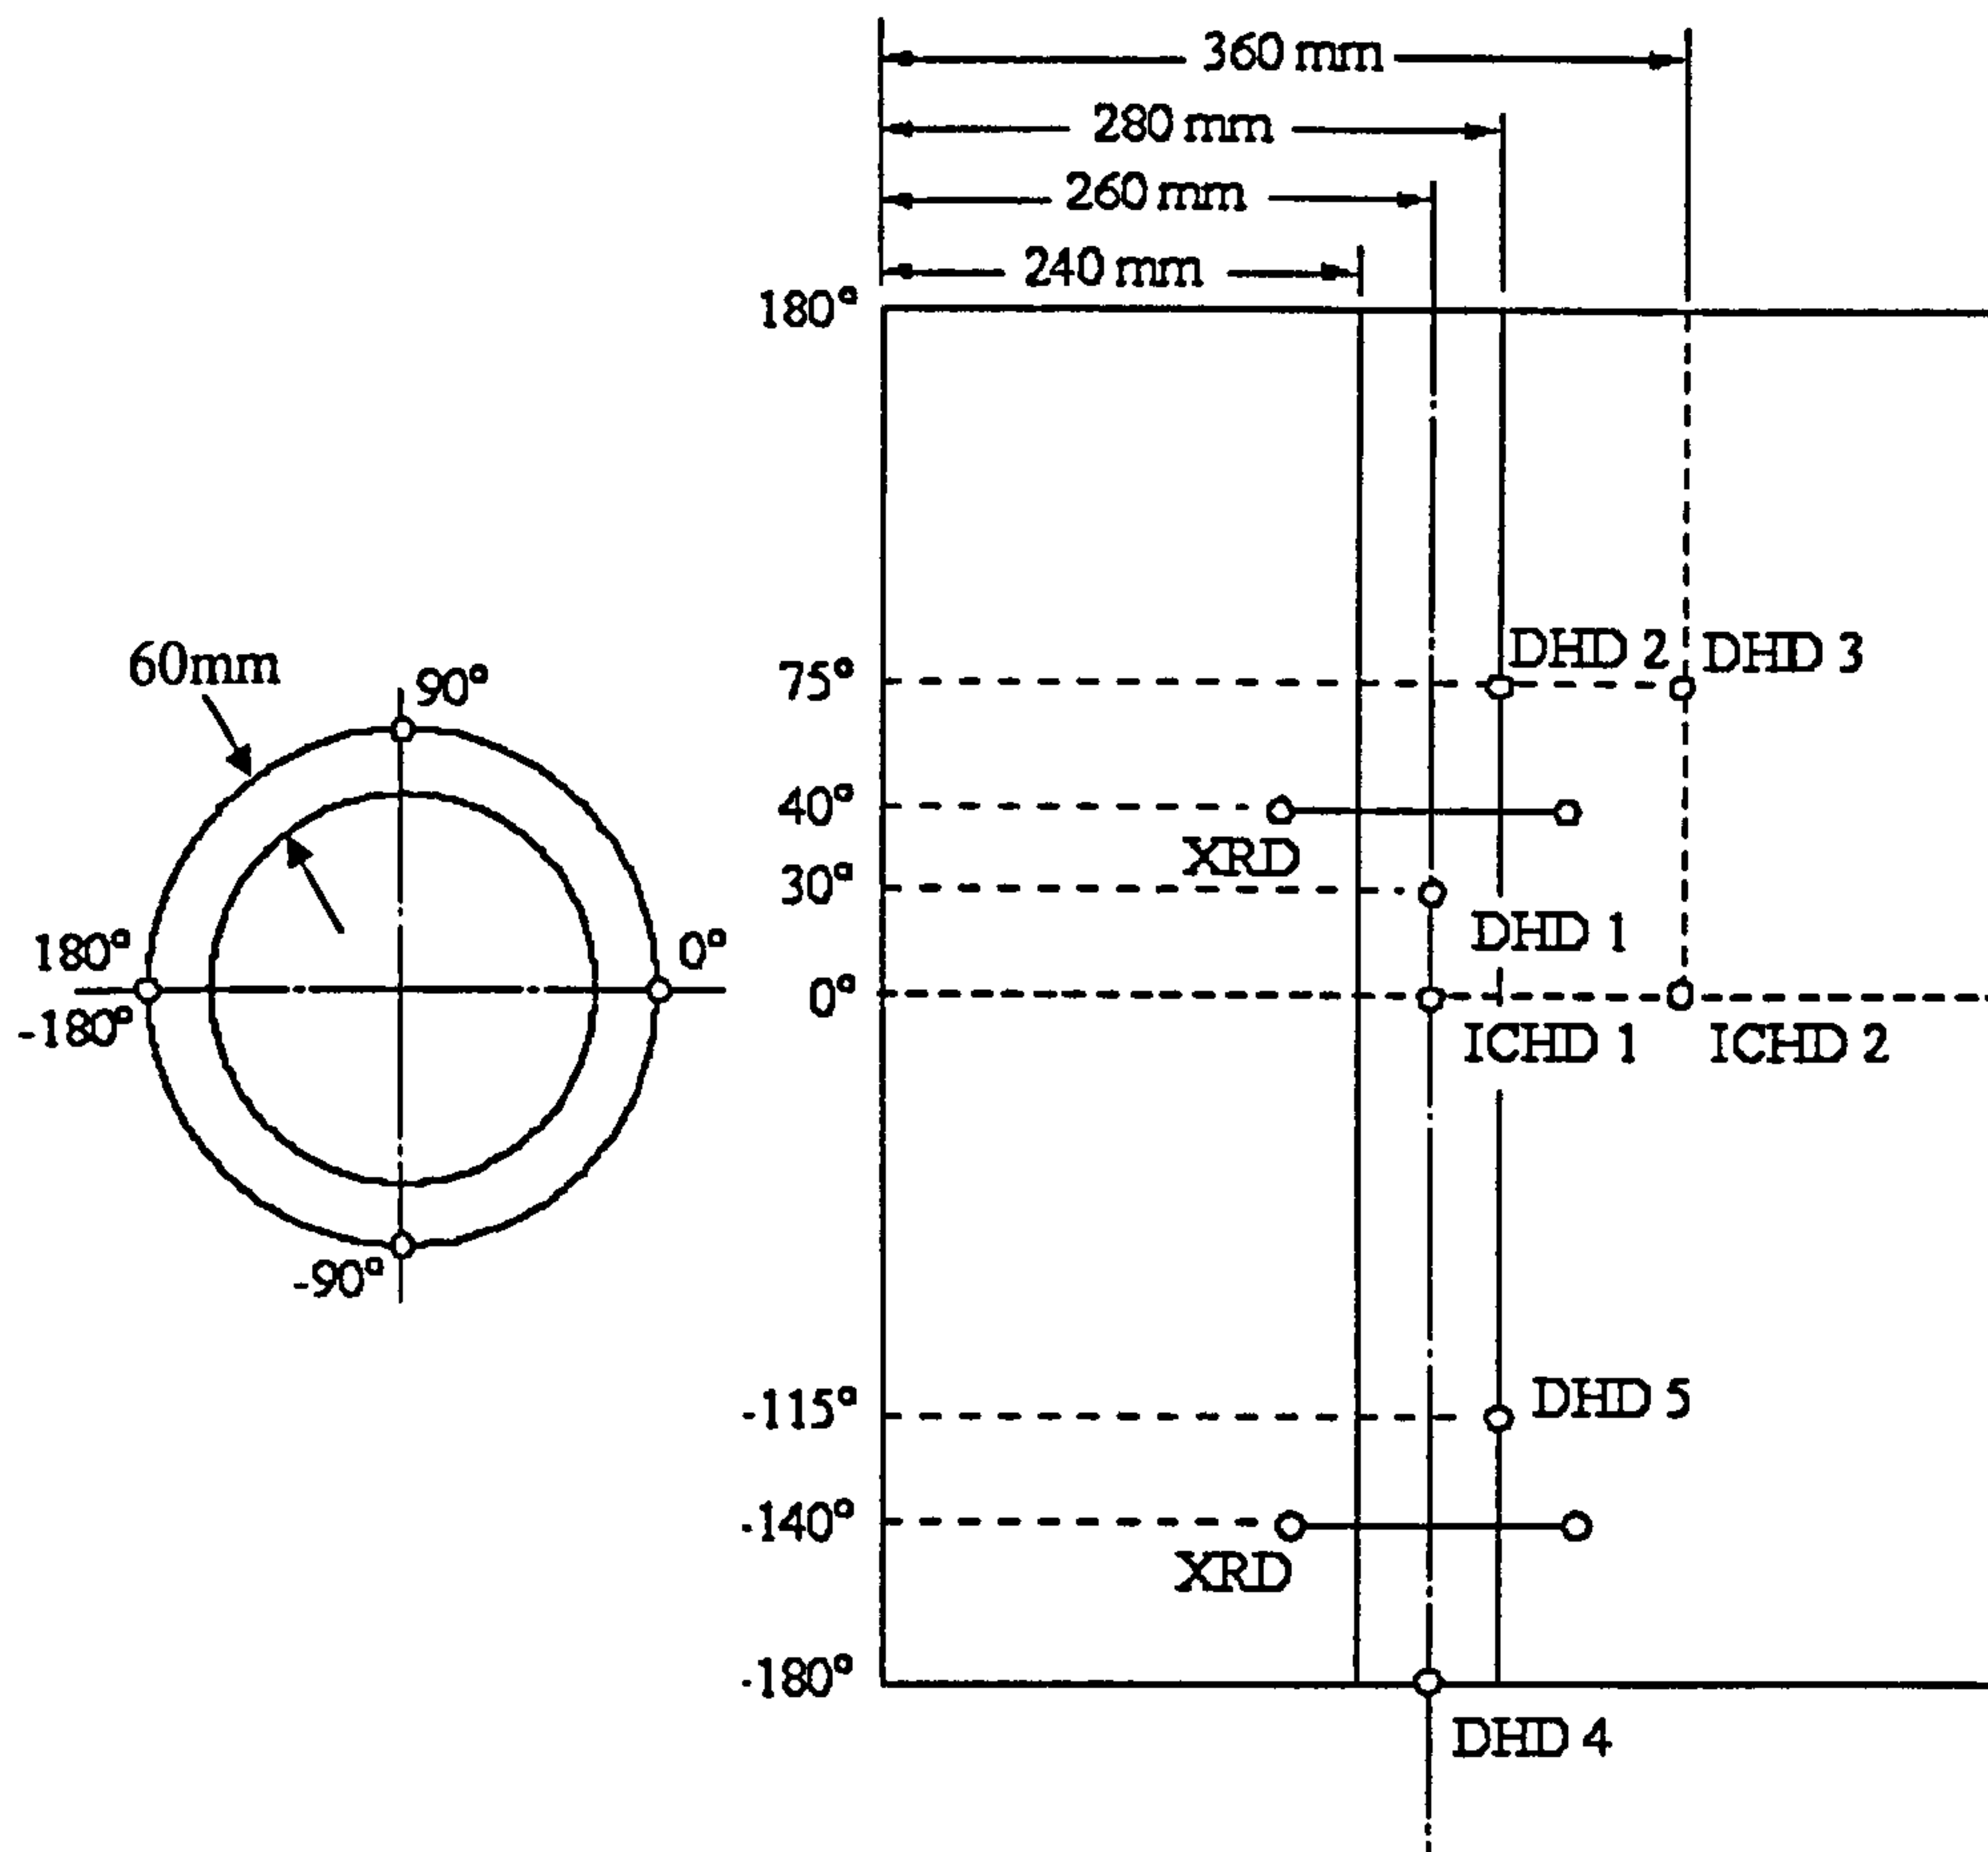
Measurement locations on weld and parent pipe.
